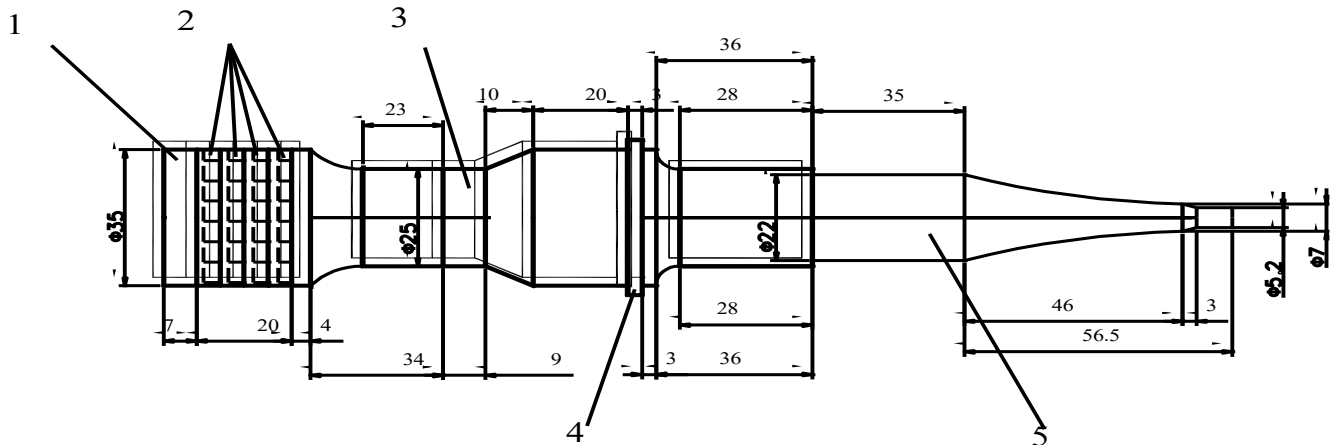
Components of the transducer designed for use in ultrasonic welding of plastics and composites;
